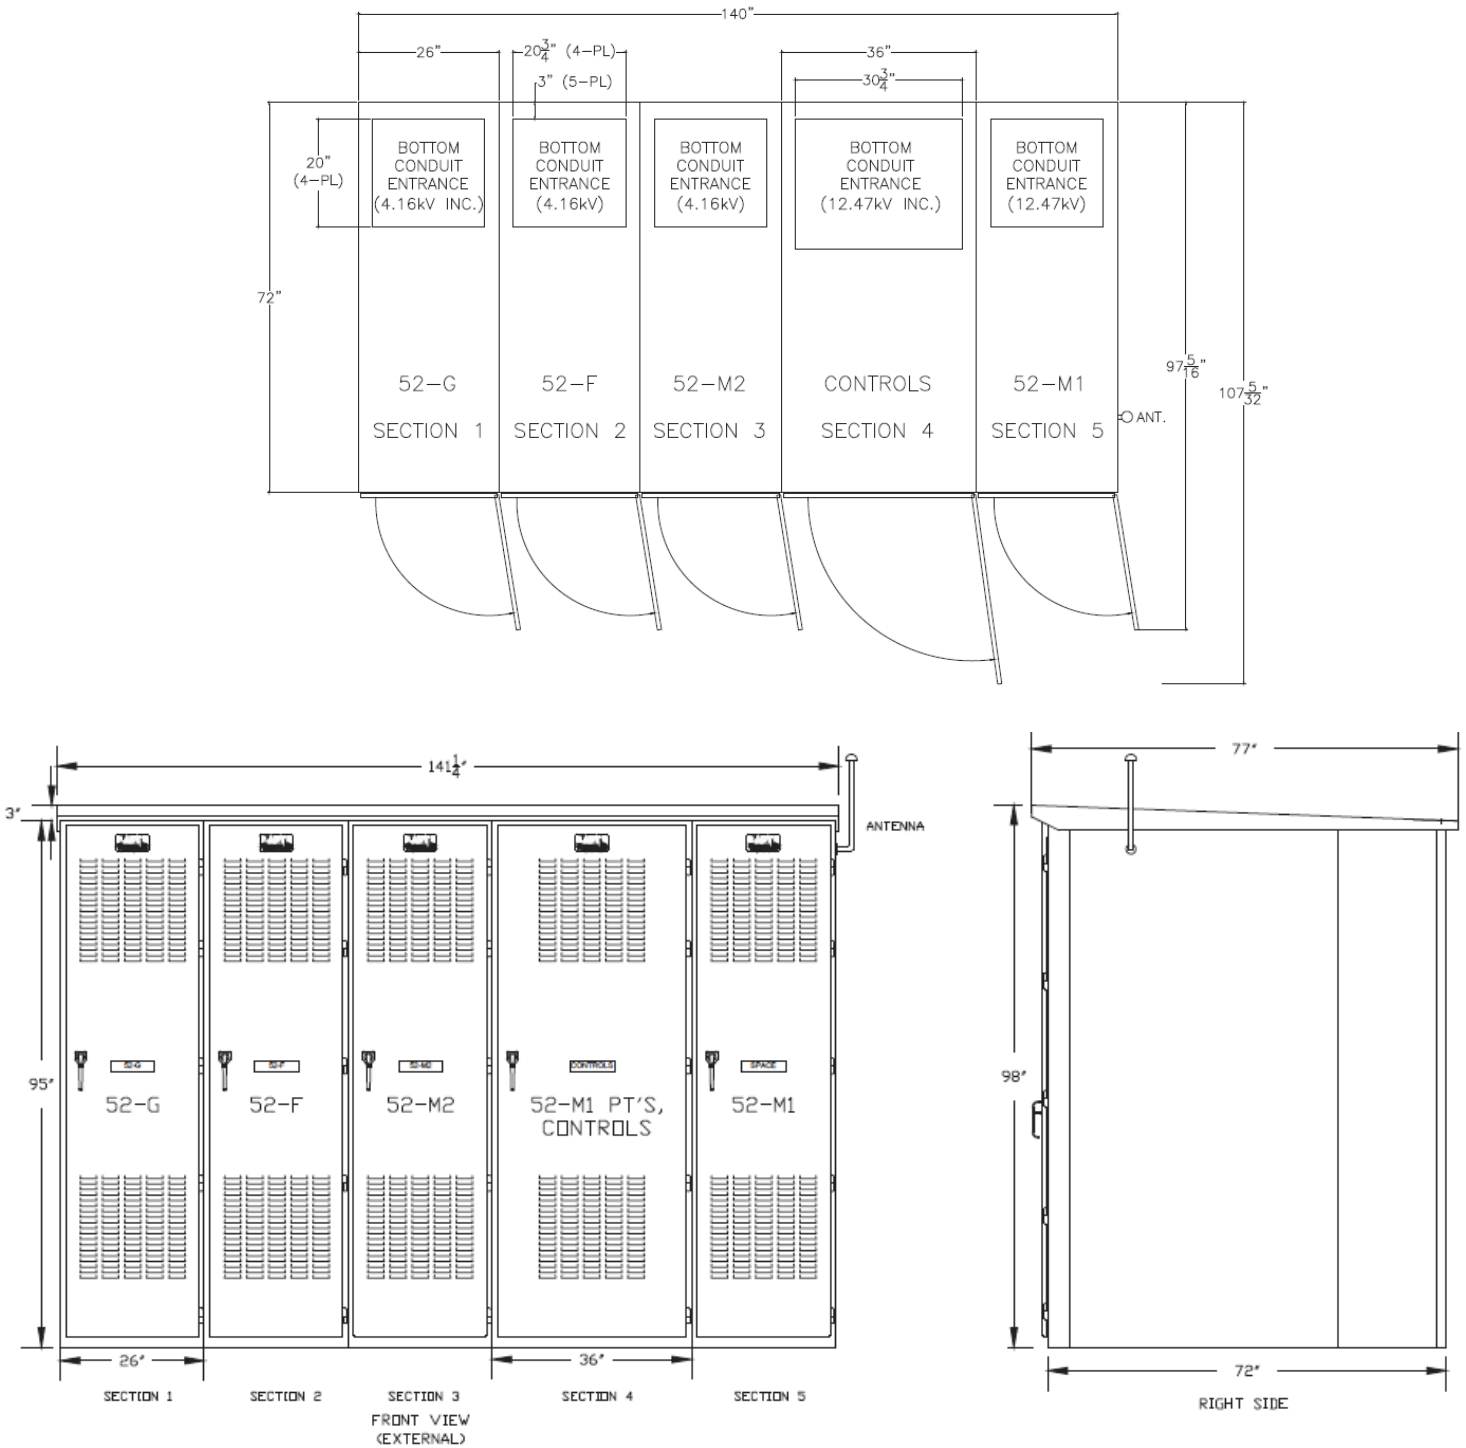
5-15 kV Metal-Enclosed Switchgear Front, Side, & Top View w/ Installation Dimensions NEMA 3R
